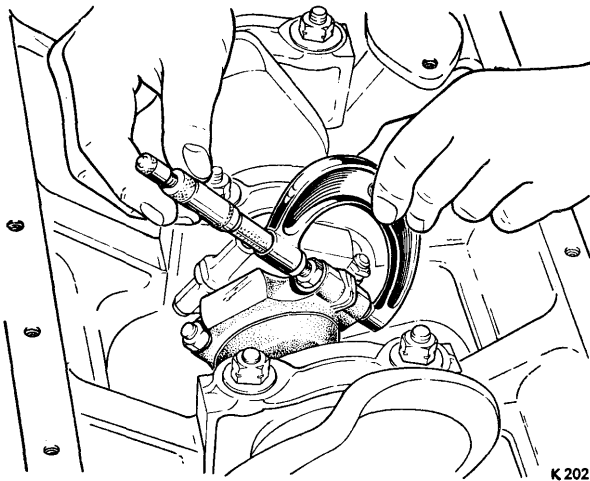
CHECKING CONNECTING ROD BOLT STRETCH
